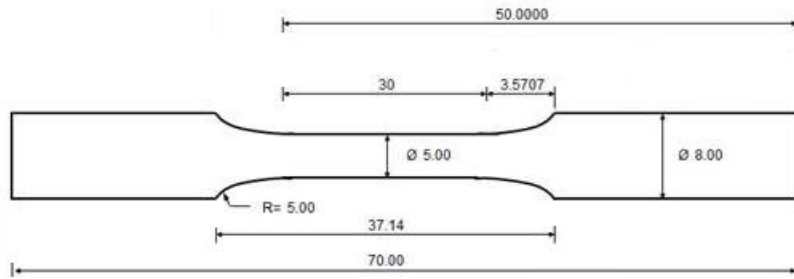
Dimensions of tensile test specimens, in mm. [Provided by SINTEF]
